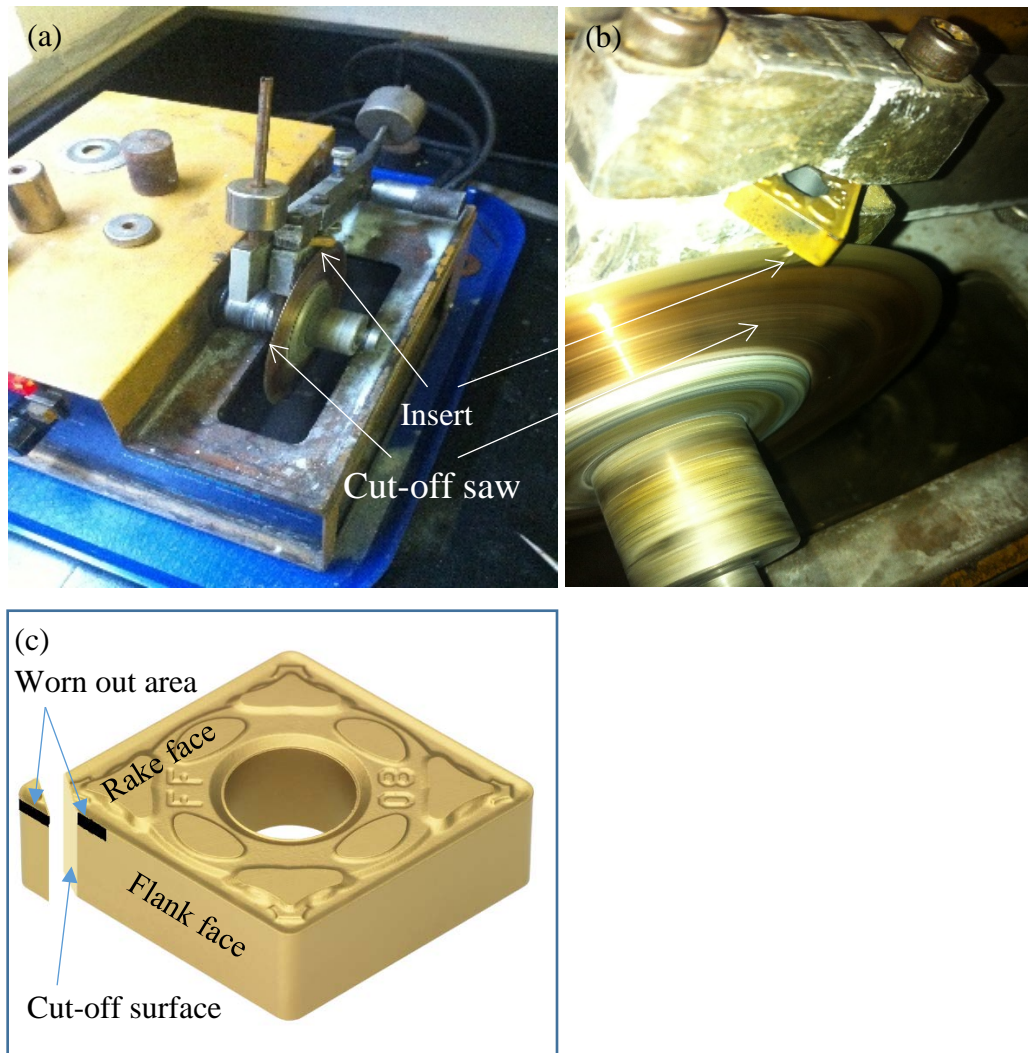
(a) Cutting the tool with a cut-off saw (b) closer picture (c) schematic picture of cut-off tool and the surfaces
